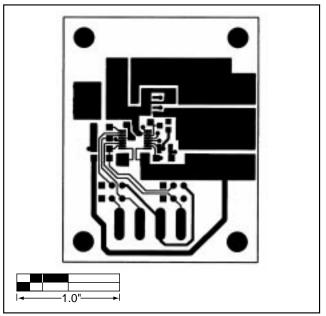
MAX1653 EV Kit PC Board Layout—Component Side
